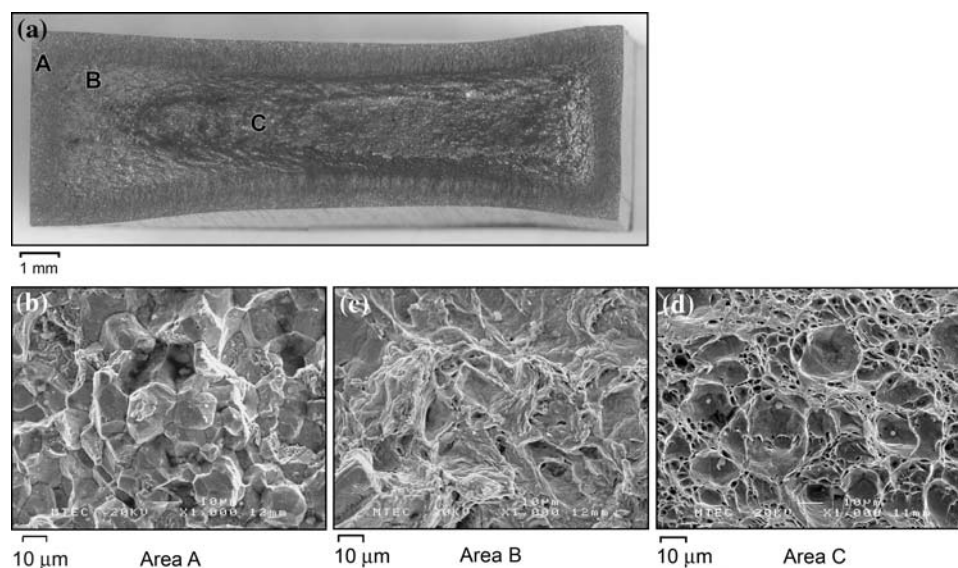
SEM micrographs of fracture surface of carbonitrided AISI 1015 steel after fatigue test at stress range of 420 MPa; (a) total fracture surface, (b) fatigue in case material, (c) fatigue in core material, and (d) final fracture in core material
